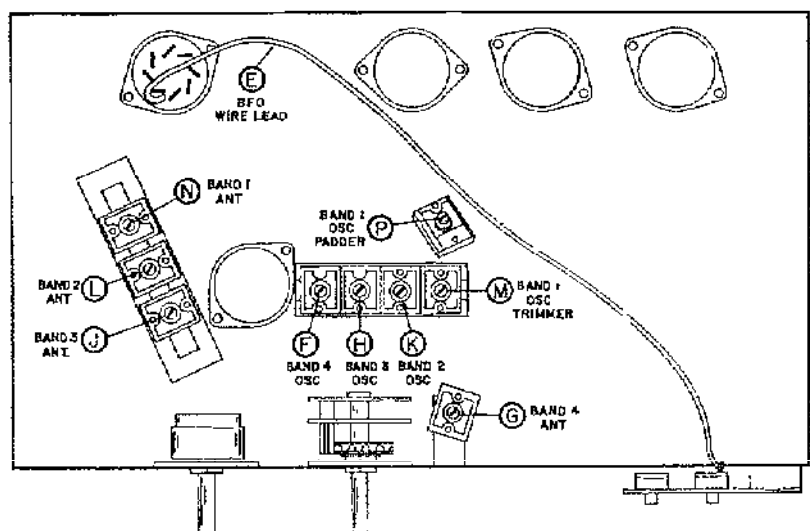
Bottom View of Chassis Showing Location of Alignment Adjustments
